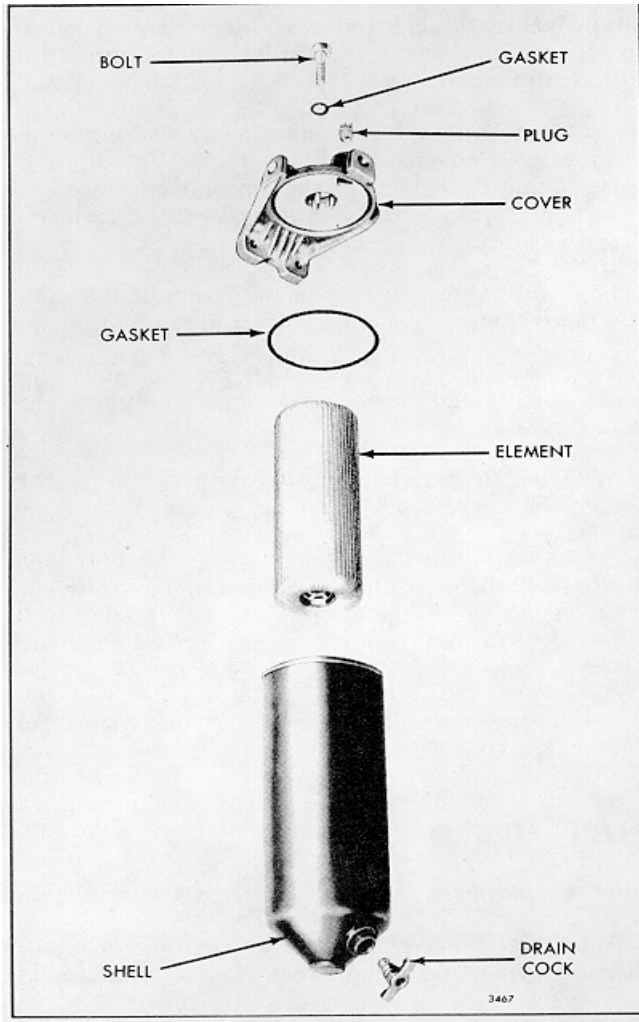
Fuel Strainer Details and Relative Location of Parts
